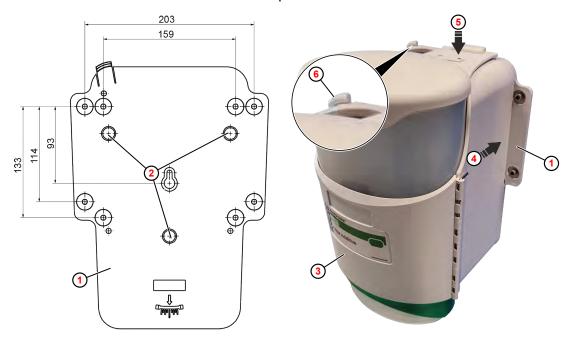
Mounting the unit (with the rinse dispenser as an example)
